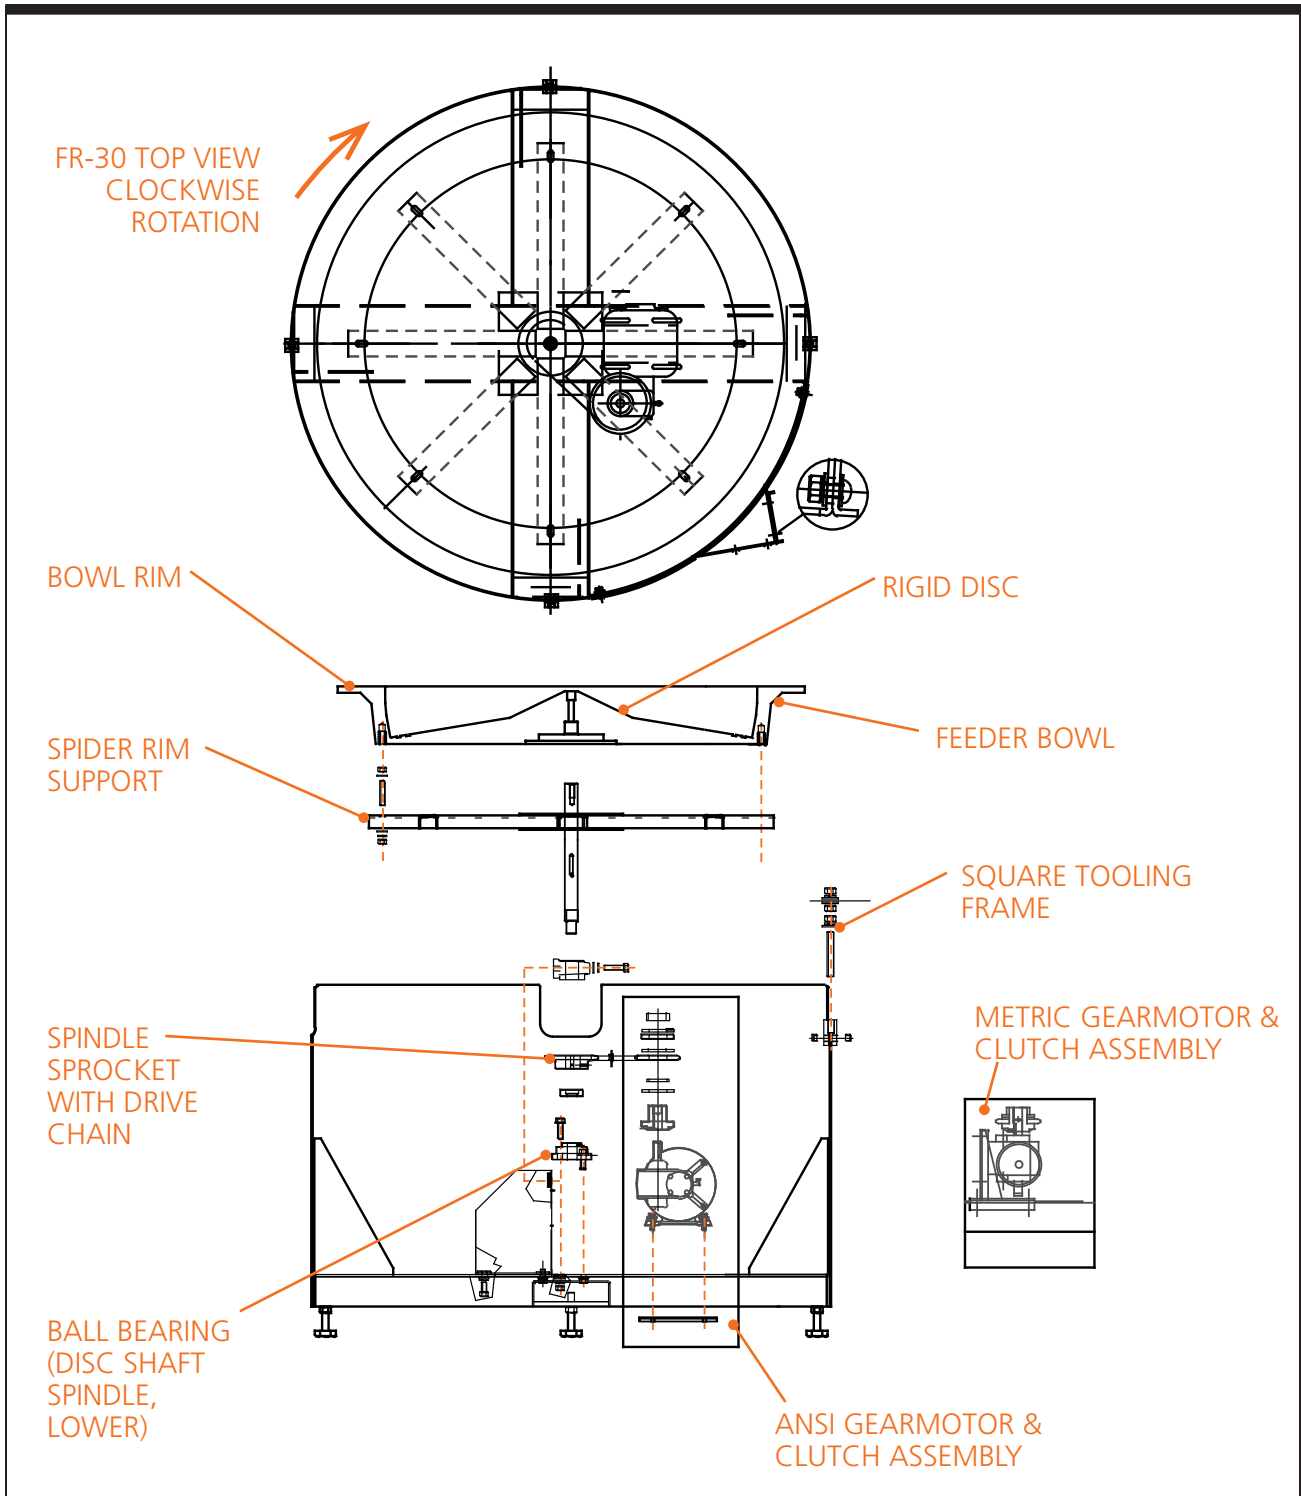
FR-20 and FR-30 Centrifugal Feeder - Exploded View
